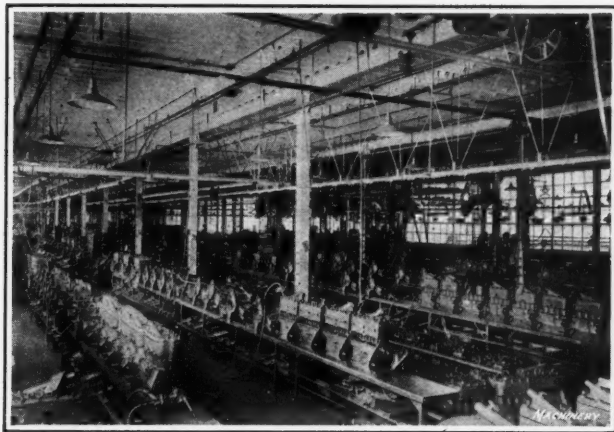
Overhead conveyors are used in the motor assembling department of the Willys-Overland Co., Toledo, Ohio, for carrying the larger parts of the motors to the assembling benches. Small parts are held in New Britain tote boxes underneath the benches, where they are within convenient reach of the operator
